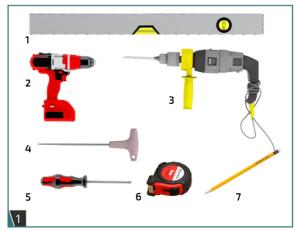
Necessary tools for assembly: (1) spirit level, (2) screwdriver (3) impact drill, (4) Allen wrench, (5) screwdriver, (6)meter, (7) pencil.
